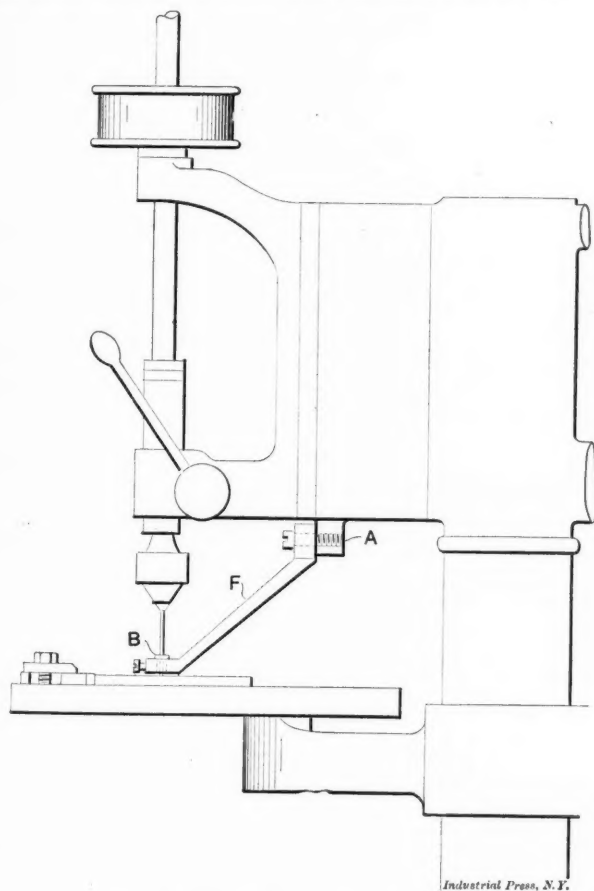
Drill Press Arranged for Drilling Jig Plates.
